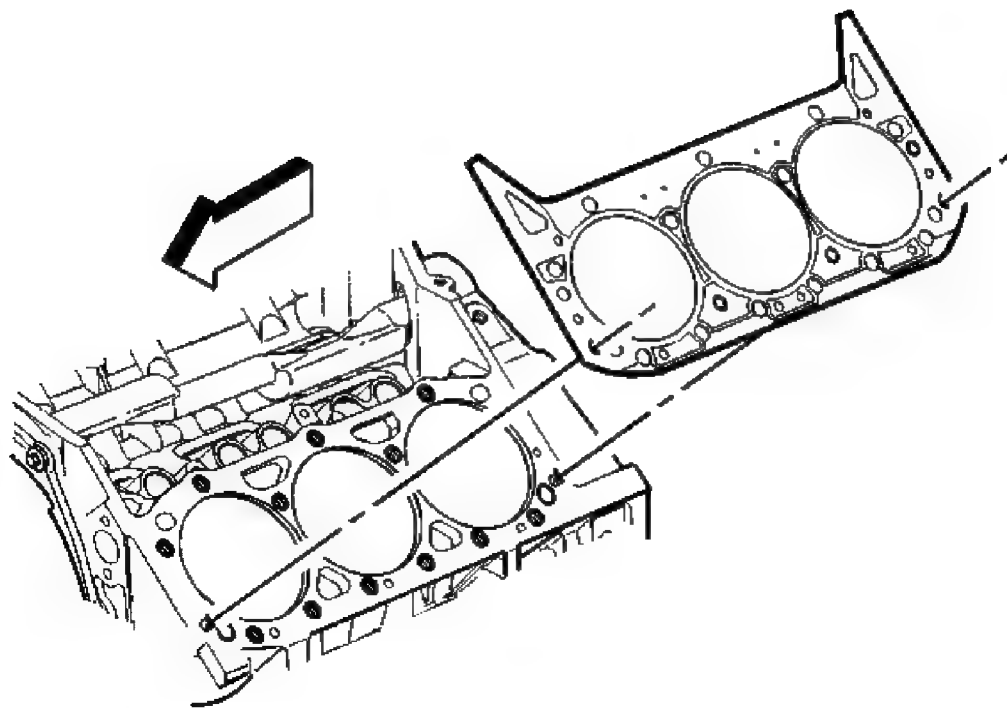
View Of Cylinder Head Gasket And Alignment Pins - Left
